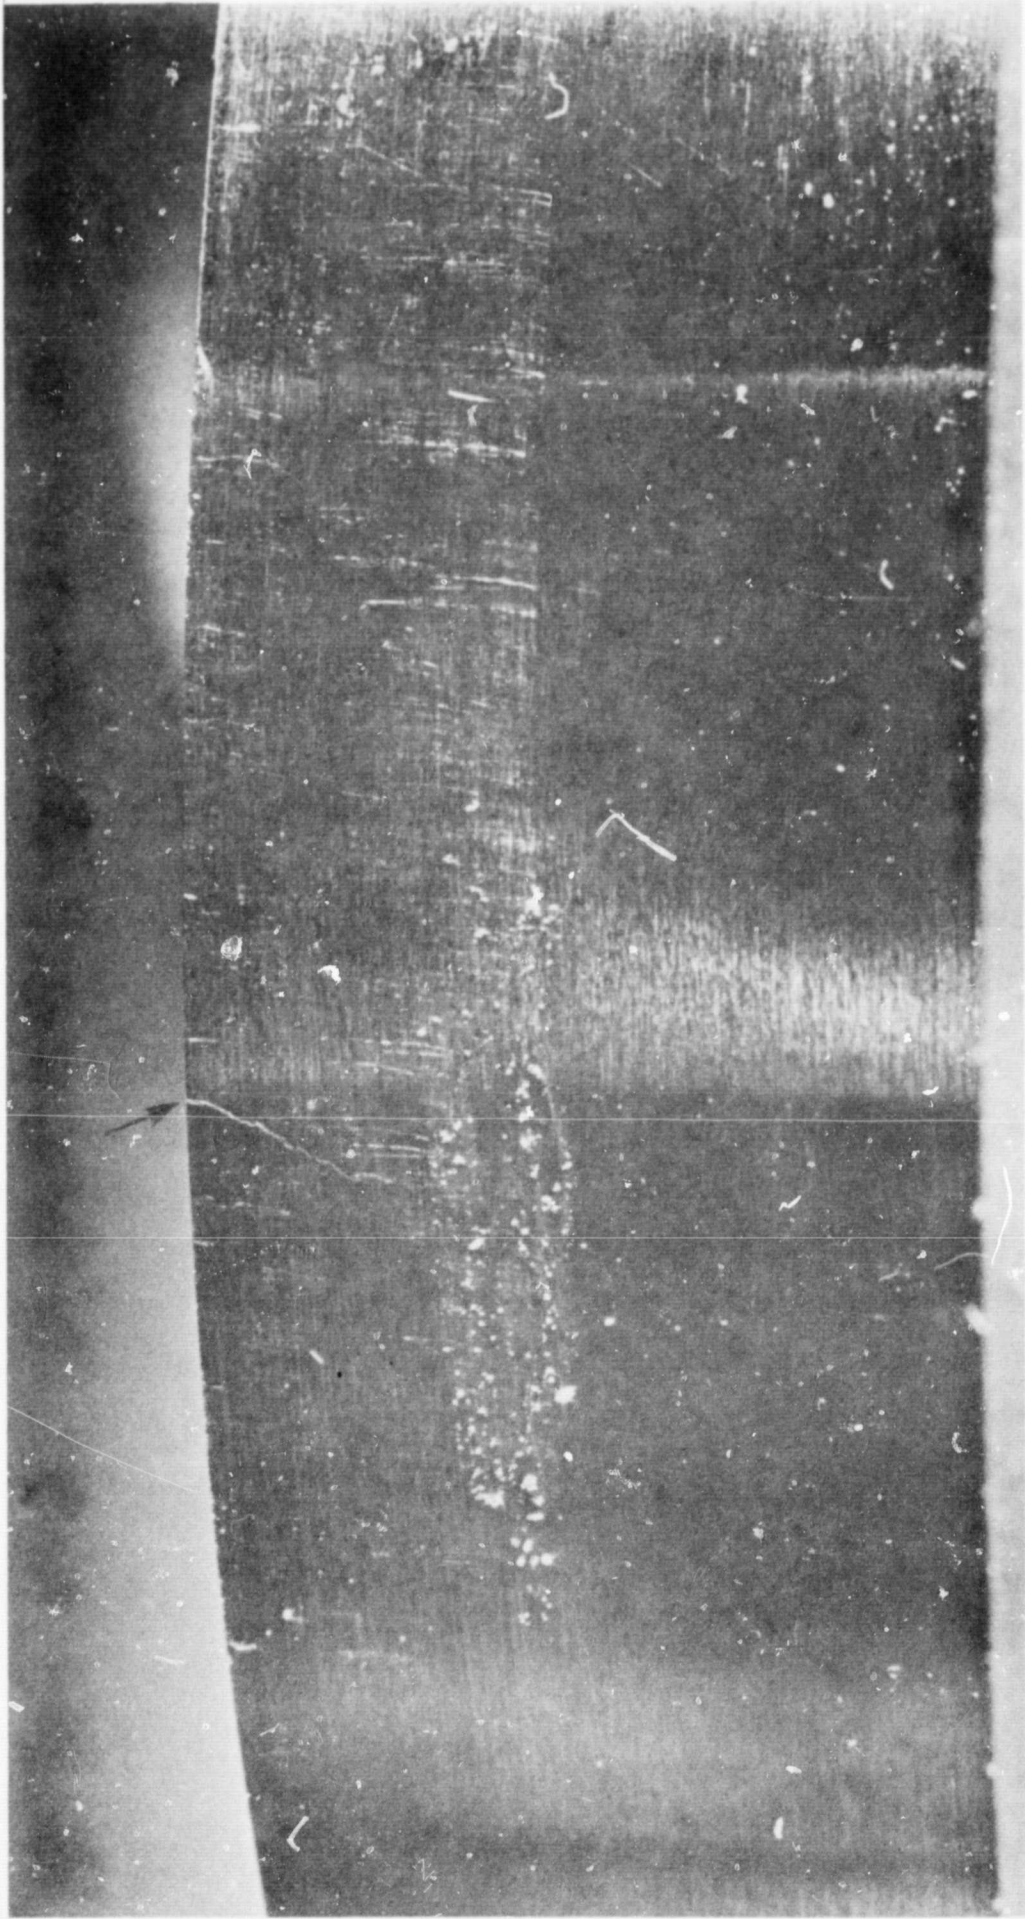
Three-Inch Cobalt Molybdenum Lip Seal
